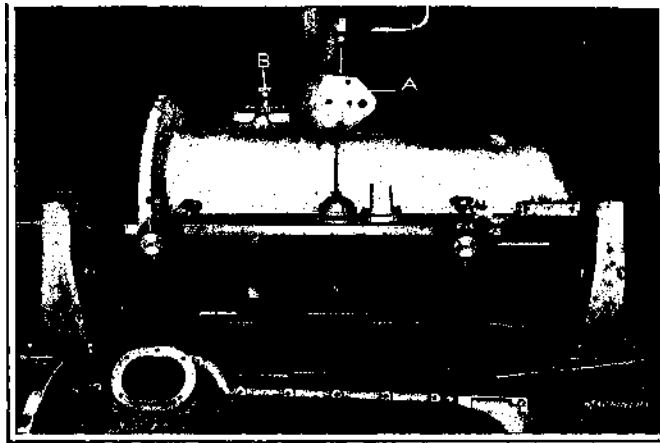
Trunnion Type of Drill Jig equipped with Milling Attachment
